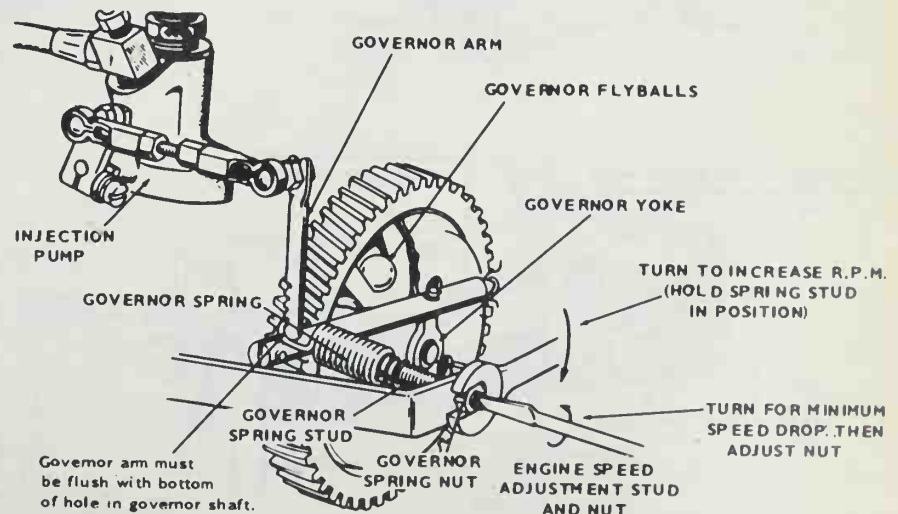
View of early governor mechanism to show points of adjustment. Governor shown is typical of constant speed type used on early air-cooled diesel models.
